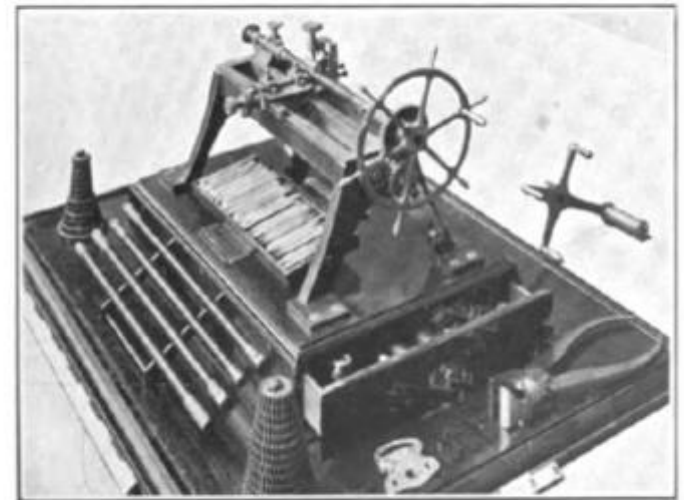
MAUDSLAY'S SCREW-CUTTING LATHE
